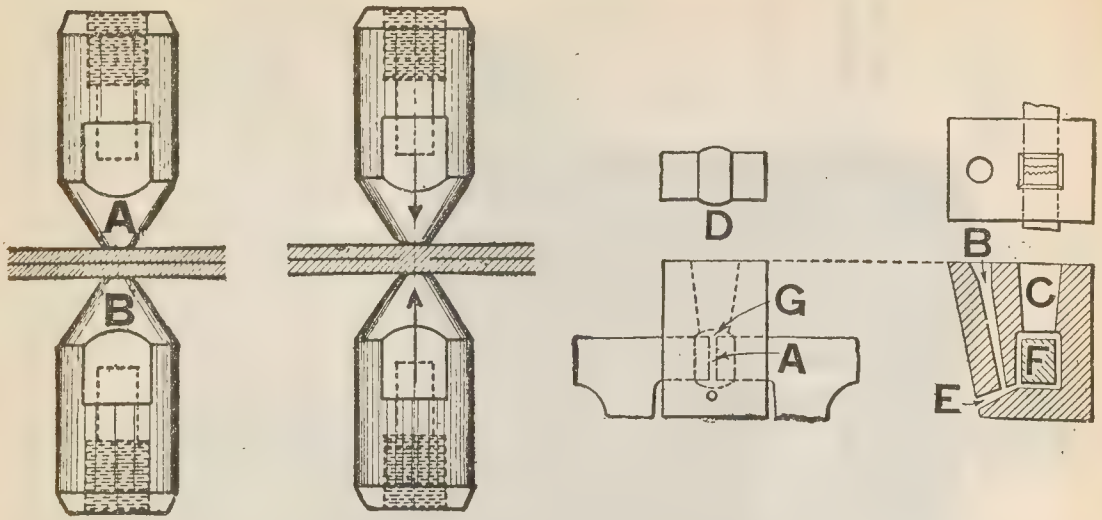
,025 and 10,026.—Views of Toledo spot welder showing parts. Two wires run to the machine from the source of supply. Connect these to the wires from the welder marked "line." A half-inch water pipe connected to the city water is ample for cooling.
